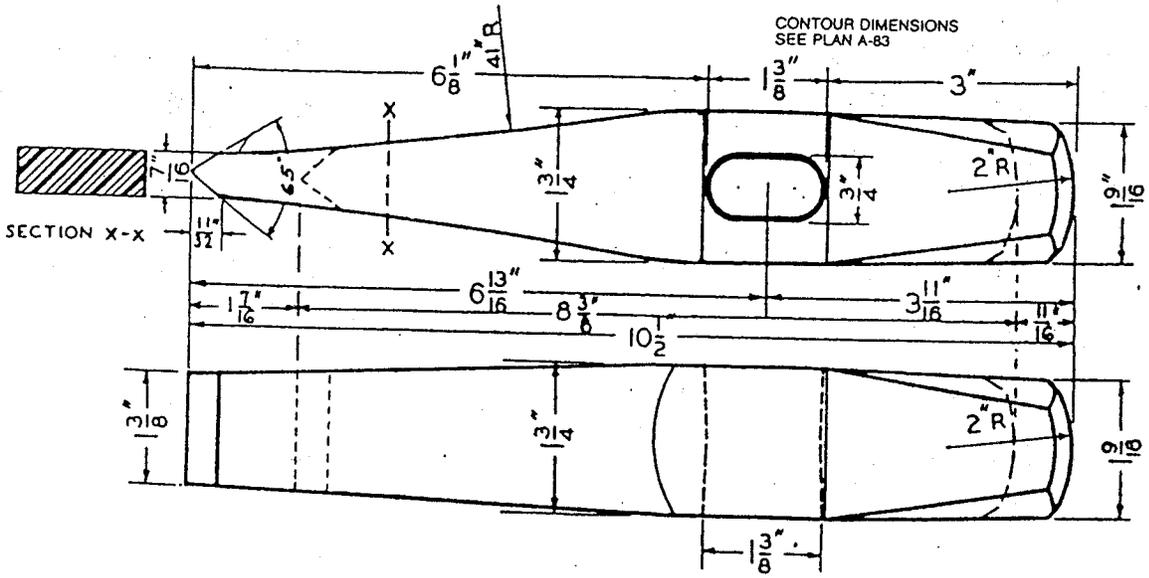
Plan 33-62 – AREMA Drive Spike Extractor Socket Wrench
